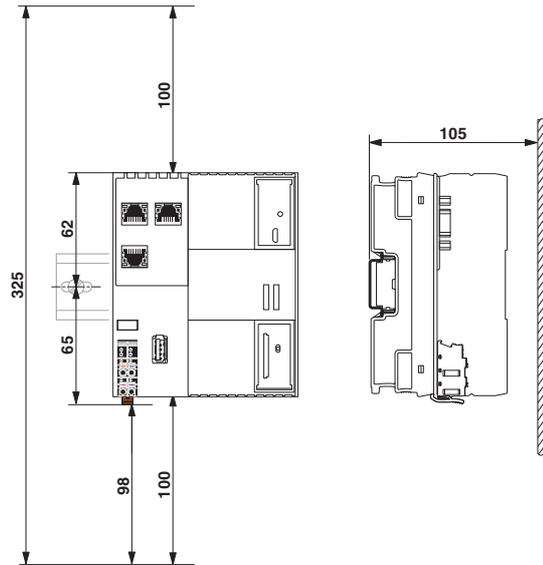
Mounting distances: XM2x controller (dimensions rounded)
